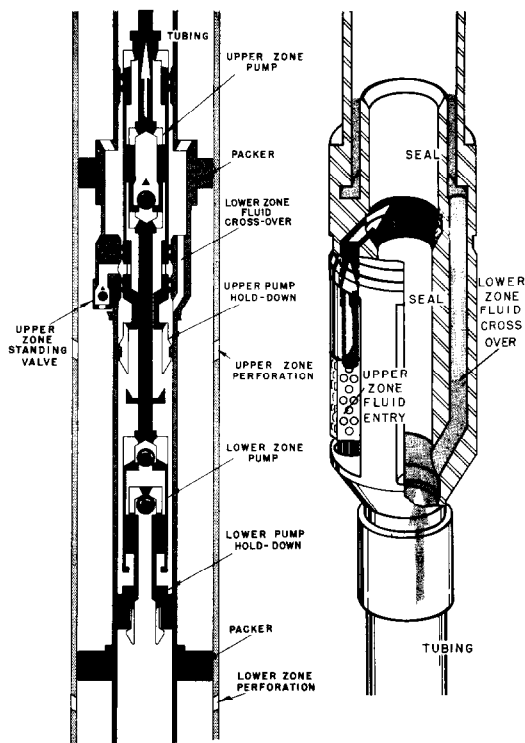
Single-tubing, Double-packer Dual-zone-pump Installation
